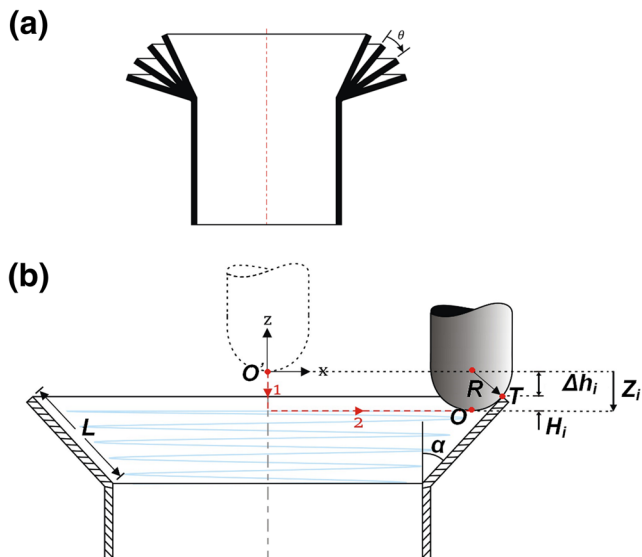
a Multistage SPIF with an angular step of θ . b Calculation of the initial position of the forming tool for i th stage
